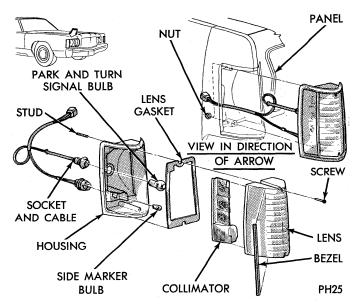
Fender Extension, Turn Signal, and Side Marker Lamp—Carline C (Newport)
